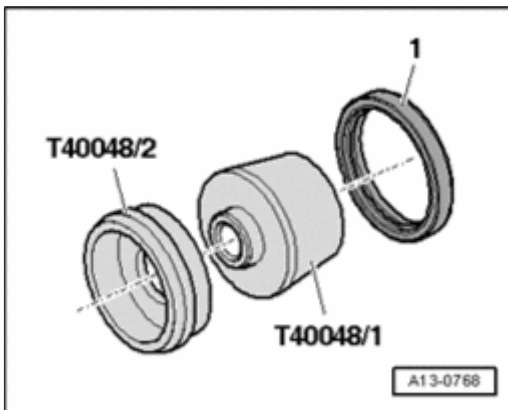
Inserting Assembly Device T40048/1 Onto Pull Sleeve T40048/2 And Slide Seal Onto Pull Sleeve
